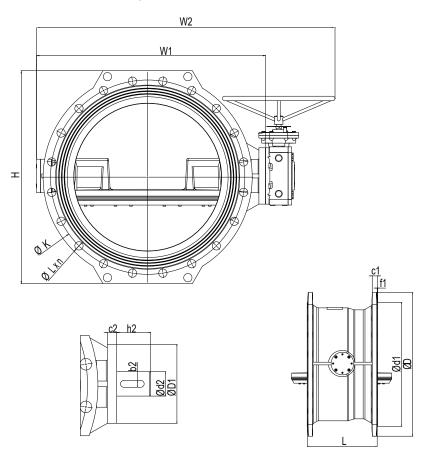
Sectional drawing PN 40 DN 100 - 600
